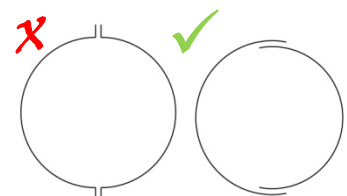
WELDING ARRANGEMENTS TO PREVENT PEELING
